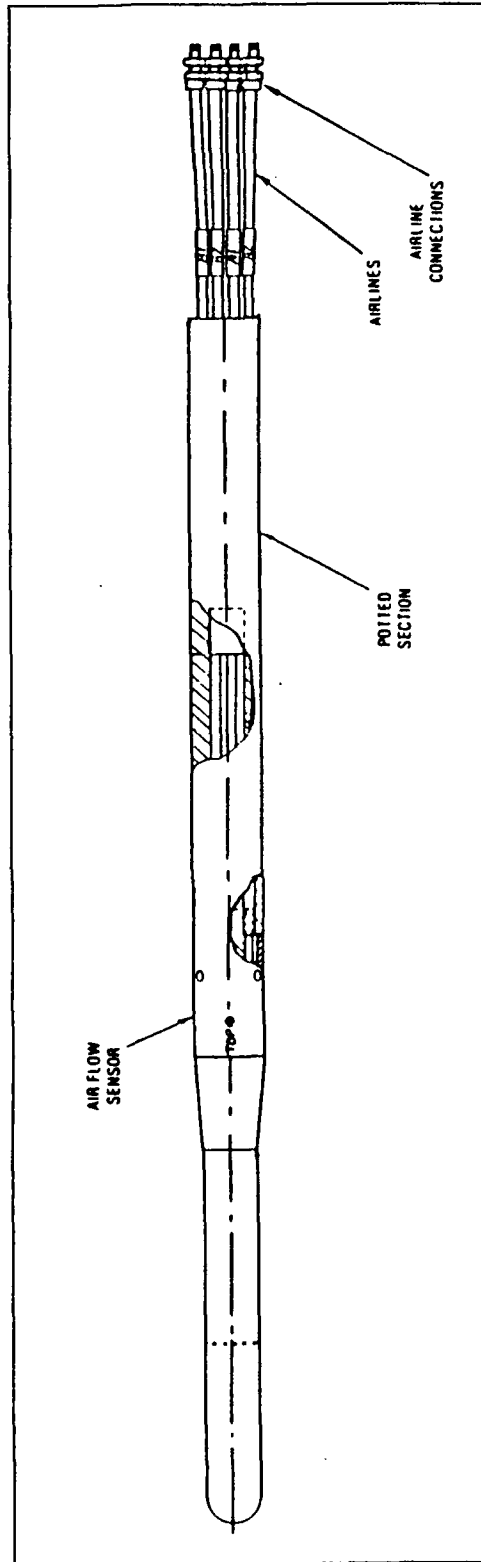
Airflow Sensor Assembly (ASA) [Ref. 1]
